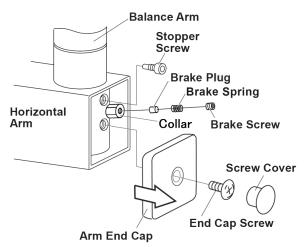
Attaching Balance Arm to Horizontal Arm
